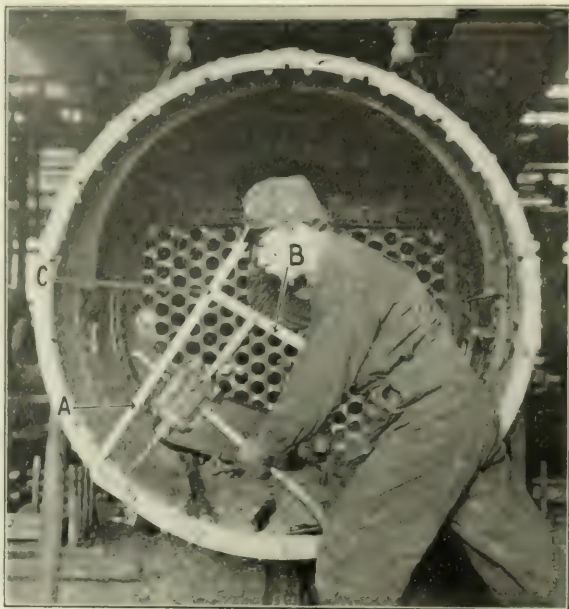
A Handy Device for Drilling Small Holes in the Front End.
